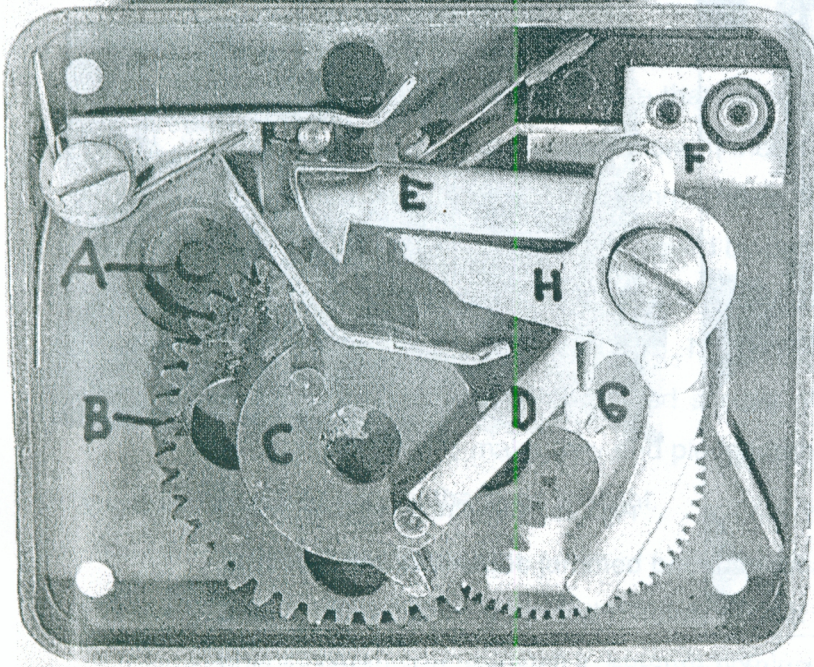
Inside of the shutter timer. It may be removed by driving up the pin in the mirror shaft. If it is badly stuck, you can remove the mirror from its shaft inside the camera by taking out three screws in the shaft and pull the lever out with its shaft intact. A real secret here that may save damage.
